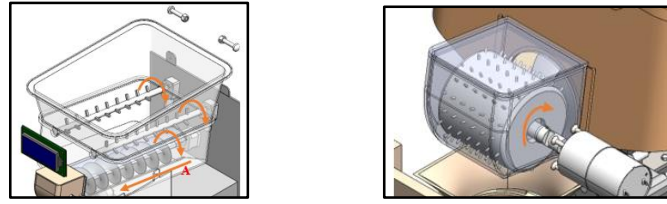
Left: Rotation of Transfer Mechanism, Right: Rotation of Unravel Mechanism
